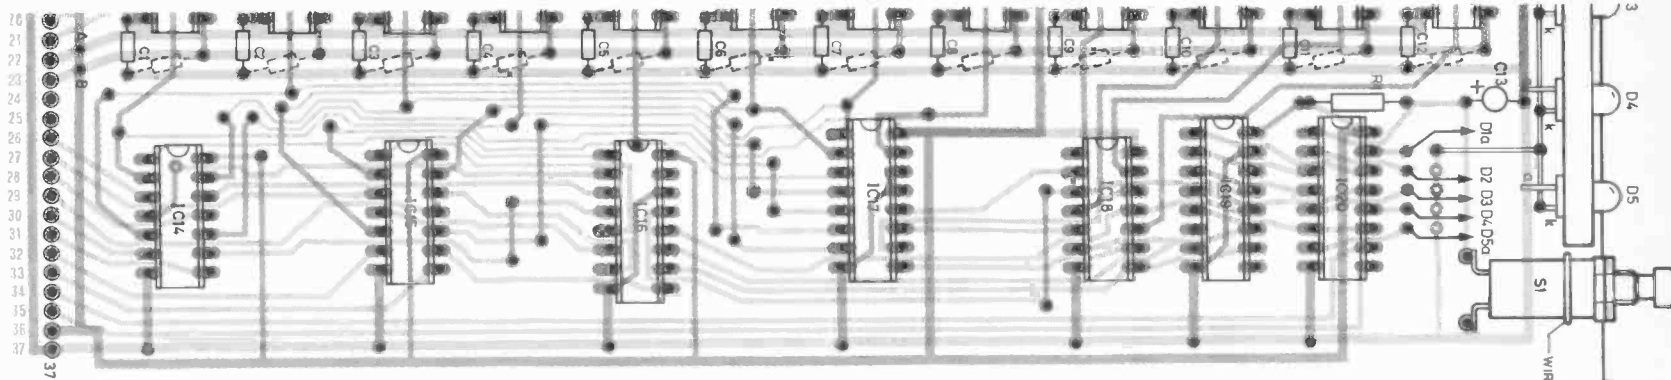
Component layout for the ECC circuit. Note when a 4164 or 4516 memory device is used, pin A should be inserted and pin B omitted. This will connect pin 8 to  $V_{DD}$  (+5V) and pin 9 to terminal 23. When a 4116 device is used then pin B should be inserted and pin A omitted. This will connect pin 9 to +5V ( $V_{CC}$ ) and pin 8 to +12V via terminal 22. The capacitors C1 to C12 are shown connected for 4164 and 4516 devices. If .4116's are used then C1 to C12 should be connected in the dotted position
